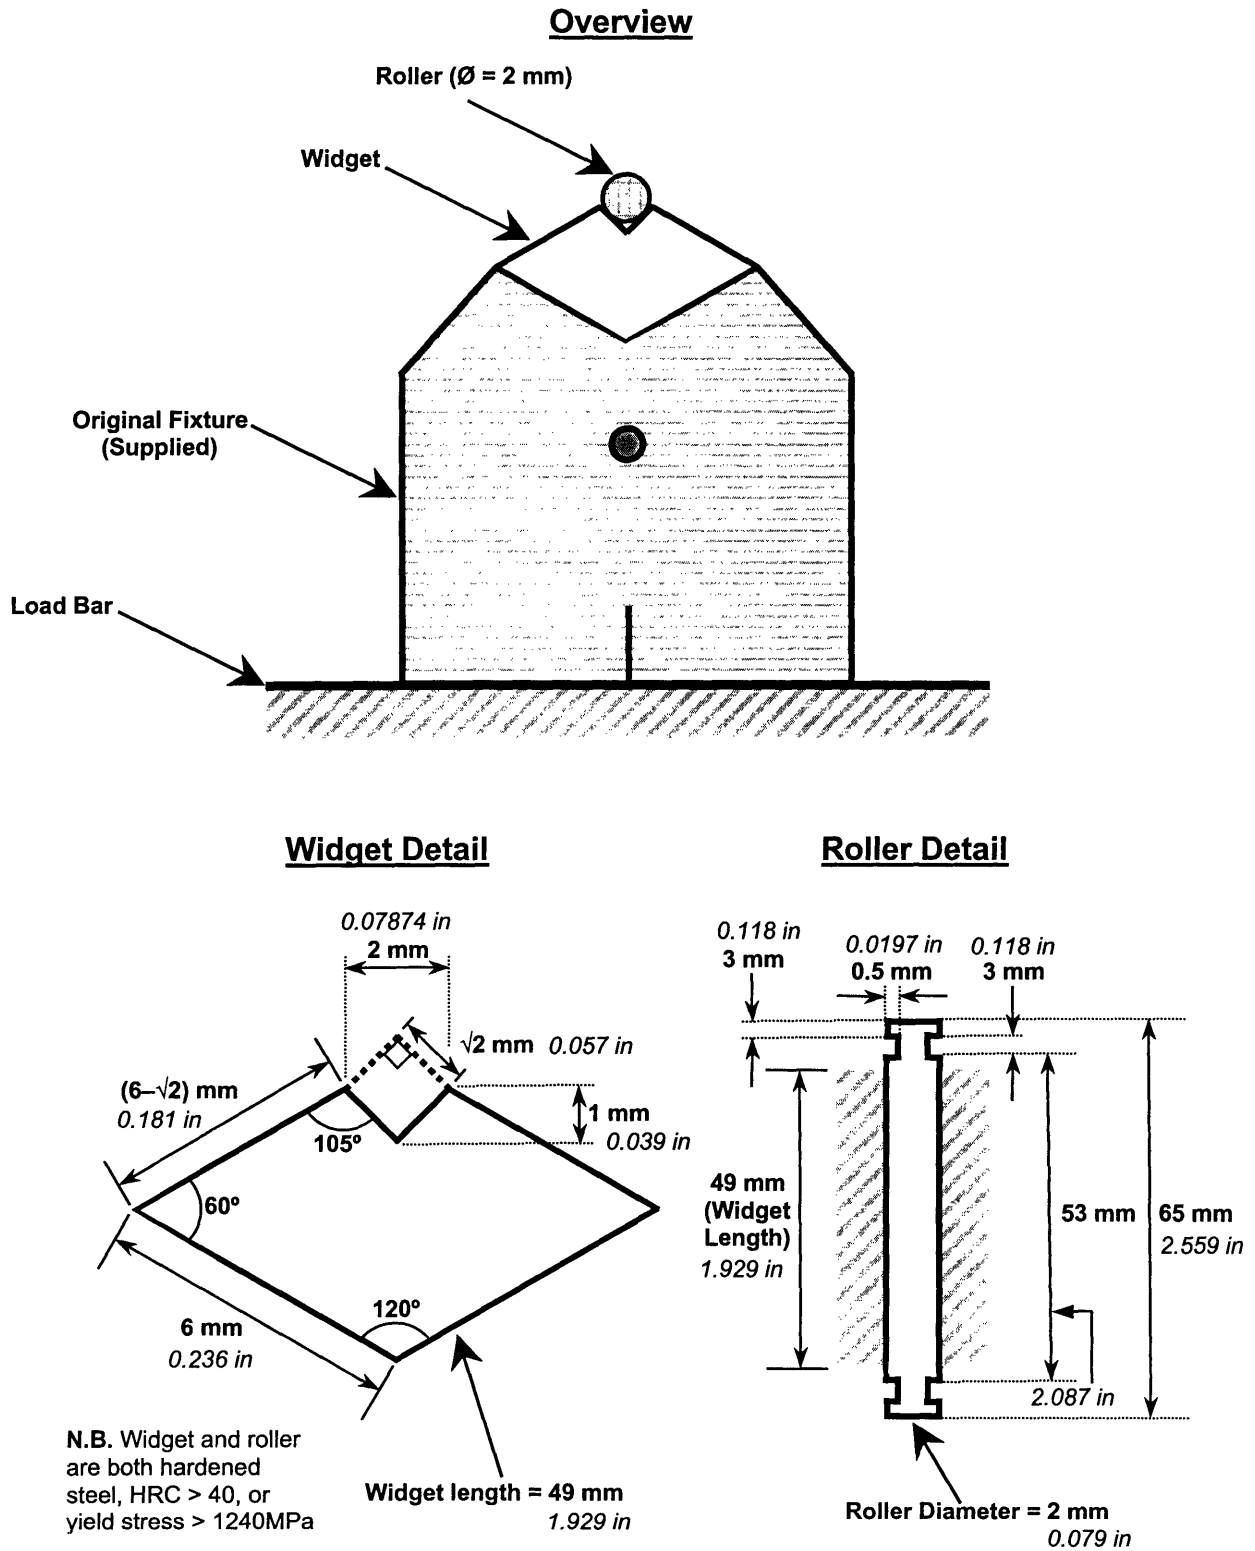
Modifications to MTS 642.01A bending fixture
